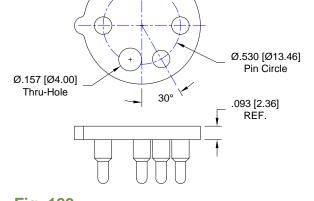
Thru-Hole: R530-SP04-01T-436P55-R27-L14 Surface Mount: R530-SP04-01T-440P55-R27-L14
